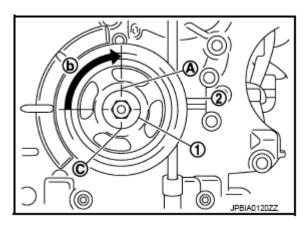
Tightening Crankshaft Bolt 90 Degrees Courtesy of NISSAN NORTH AMERICA, INC.
